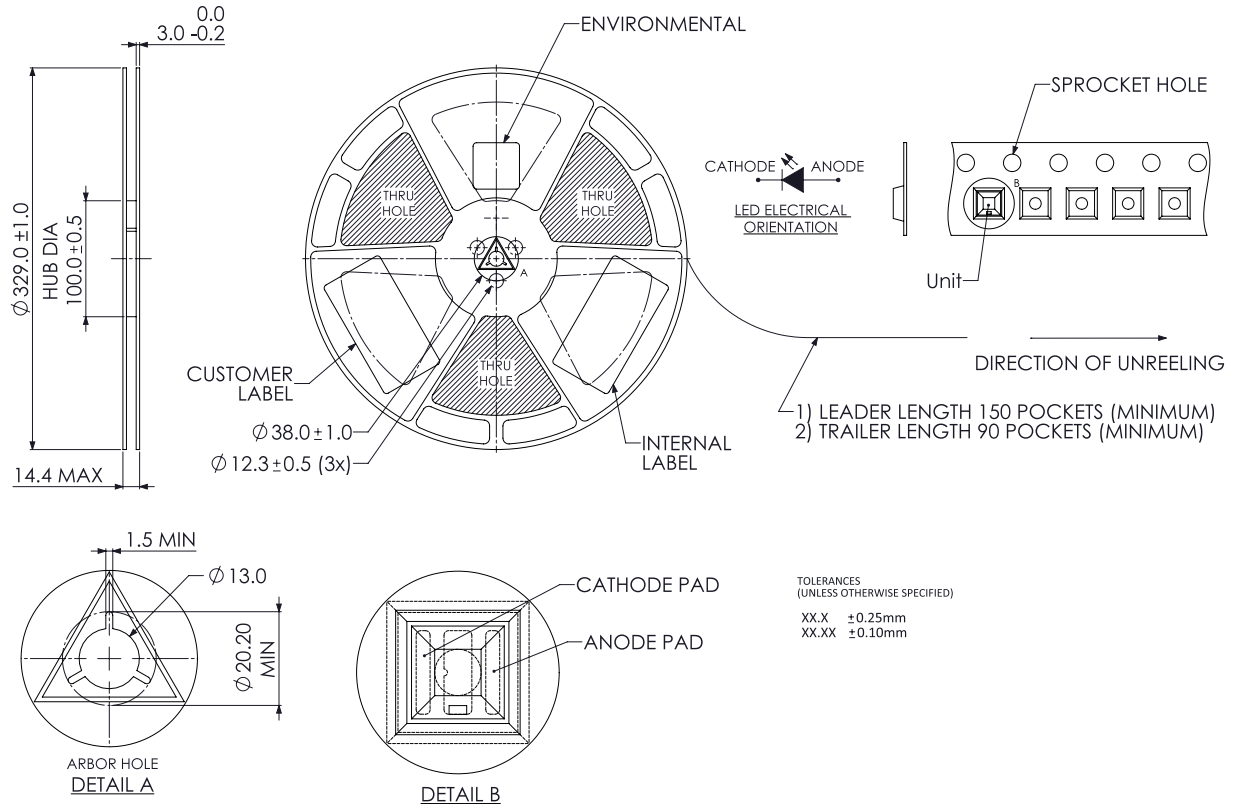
Reel dimensions for LUXEON CZ Color Line.
